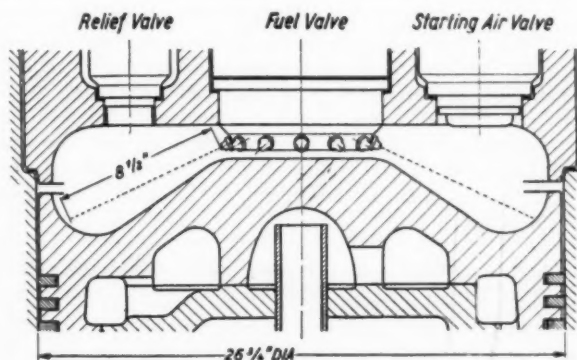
TOP COMBUSTION CHAMBER, NEW DESIGN
